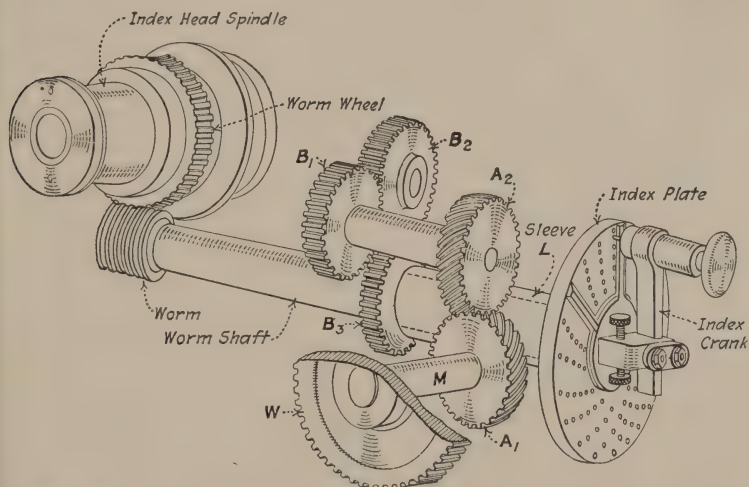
Spiral head gearing (Brown & Sharpe). Motion transmitted from W through M to A_1 to A_2 to B_1 and B_2 (idler) to B_3 , through sleeve L to index plate to index crank to wormshaft, worm, wormwheel, spindle, and work.
